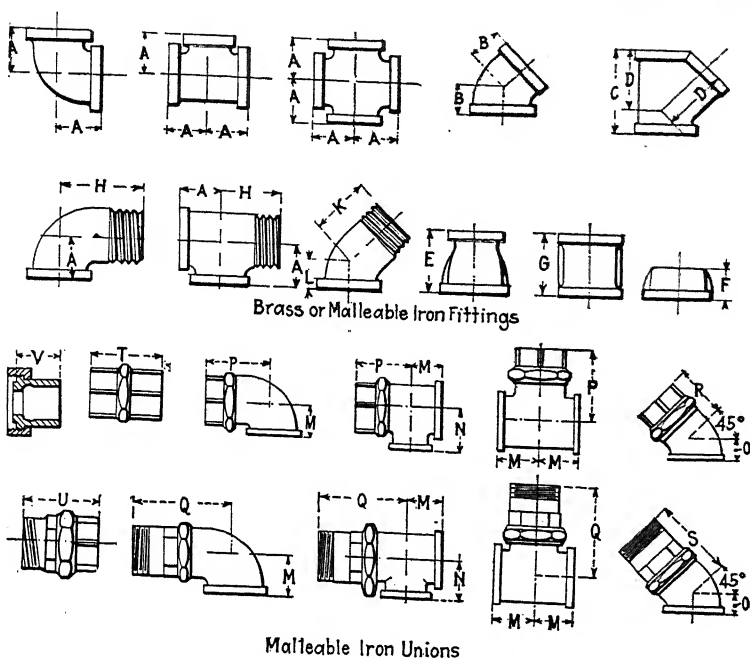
Dimensions of malleable iron and fittings for threaded wrought pipe.
